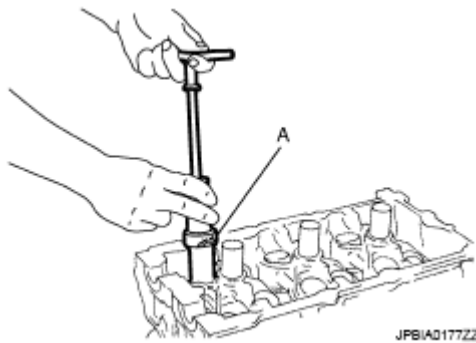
Using Valve Oil Seal Puller To Remove Valve Oil Seal
